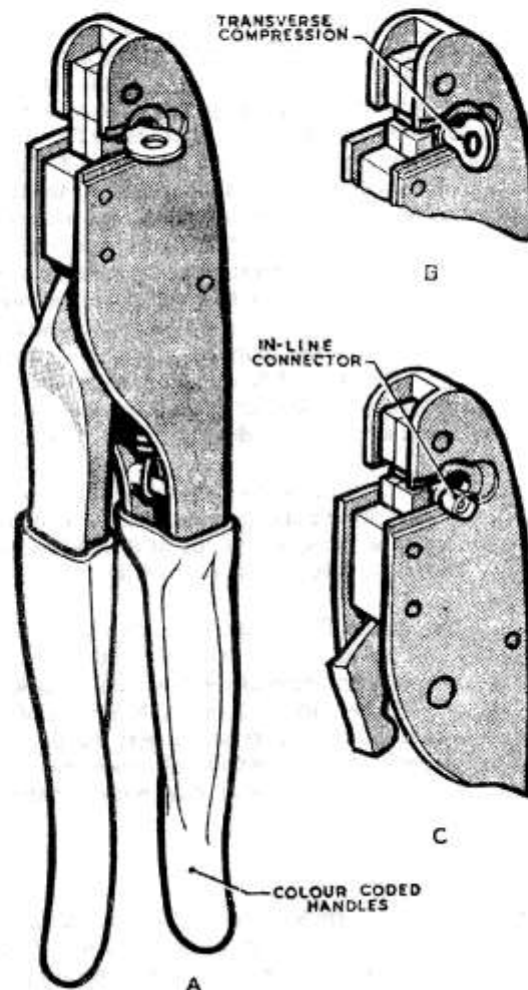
HELLERMANN HAND CRIMPING TOOL
